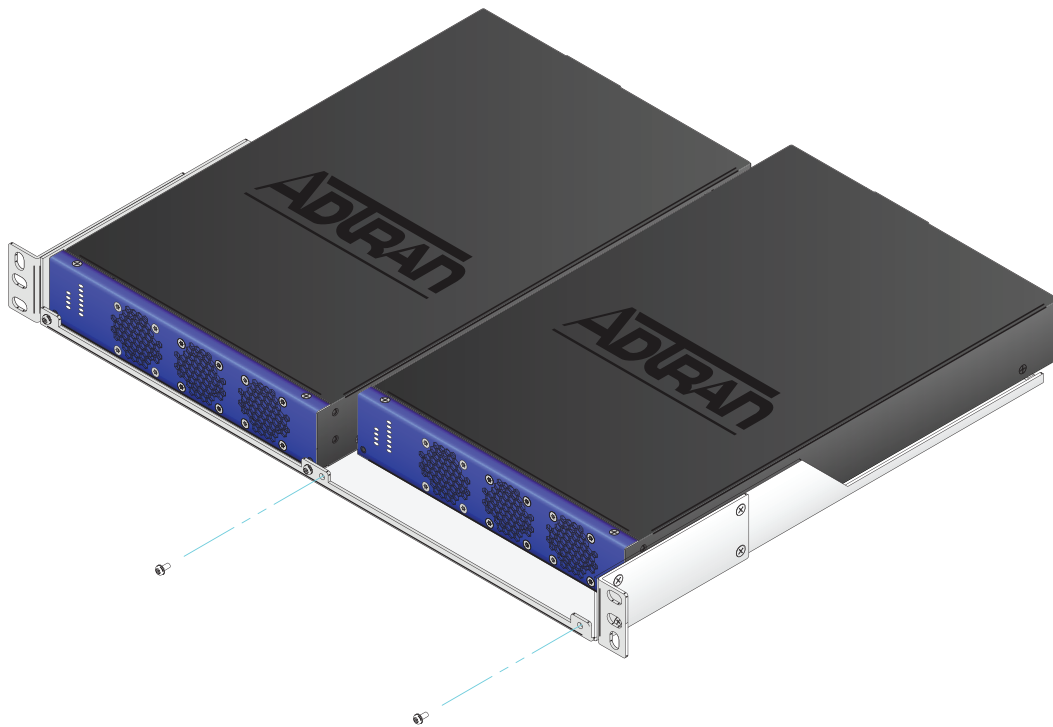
Rack Mounting the NetVanta 1131 Using the Dual Mounting Tray
